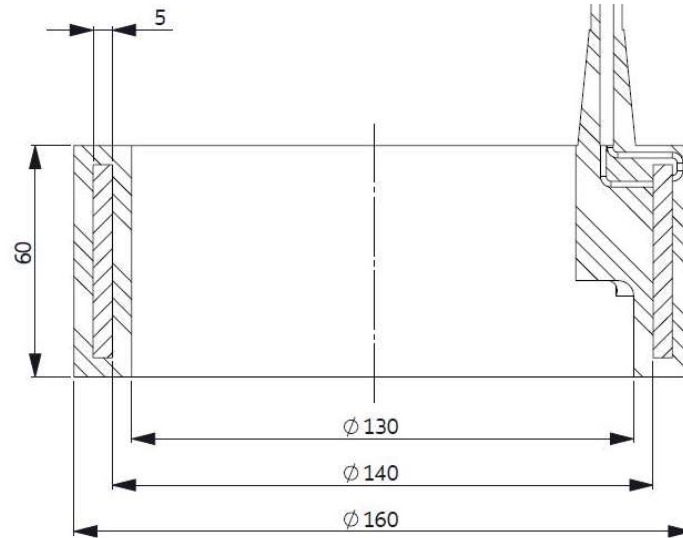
Schematic of the RPC transducer moulded in PU.
